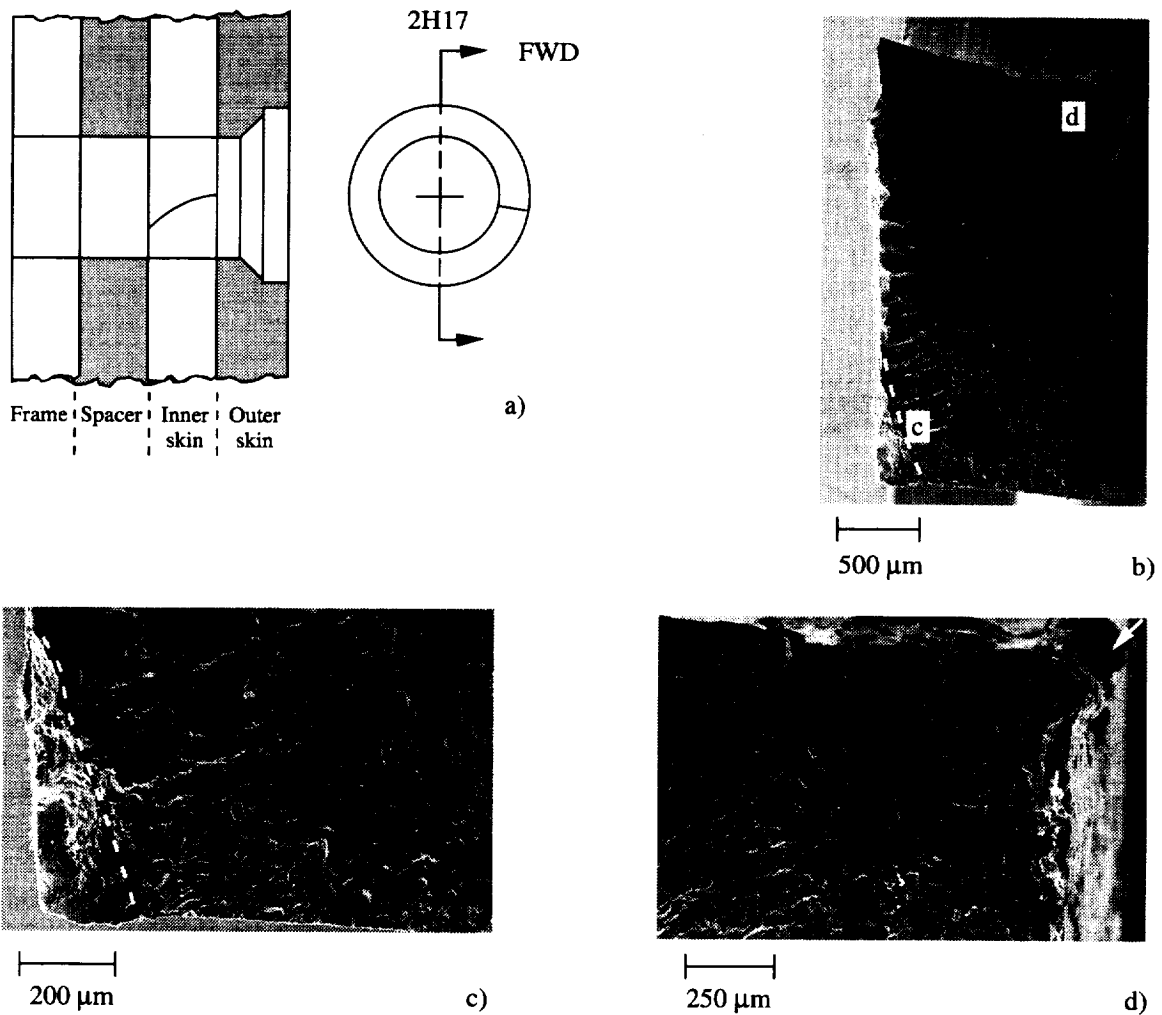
a) The schematic shows the rivet hole 2H17 configuration and the location of the inner skin fatigue crack oriented in the forward direction and about the 3 o'clock position. b) The SEM micrograph shows the fatigue crack fracture surface (the direction of crack propagation is from top to bottom of the figure) at the inner skin rivet hole which is located at the top of the micrograph. The fatigue crack was cut during the removal of the specimen from the panel and a portion of the fatigue crack surface is not shown in the figure. c) The SEM micrograph shows the fatigue crack surface at region "c" in Figure 7.31.b. The dashed line marks the remainder of the fatigue crack front. The crack front configuration suggests that the crack extends farther along the outboard surface of the inner skin compared to the inboard surface. d) The SEM micrograph shows the crack initiation region near the outboard corner of the rivet hole (region "d" in Figure 7.31.b). The region of crack initiation (arrow) along the outboard faying surface exhibits disturbed metal.
